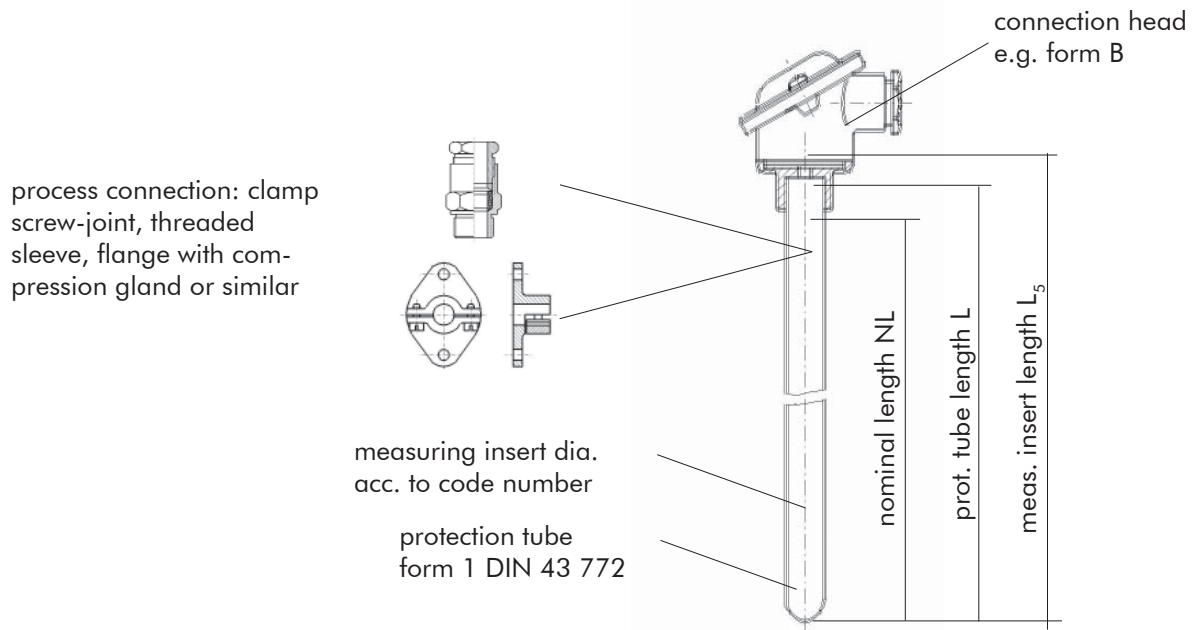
Thermocouple and resistance thermometer with protection tube form 1.
